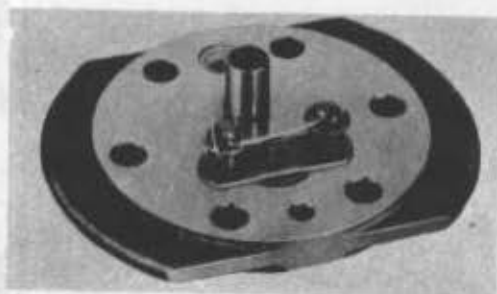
Compressor valve plate assembly. (Courtesy Tecumseh Products Company.)
